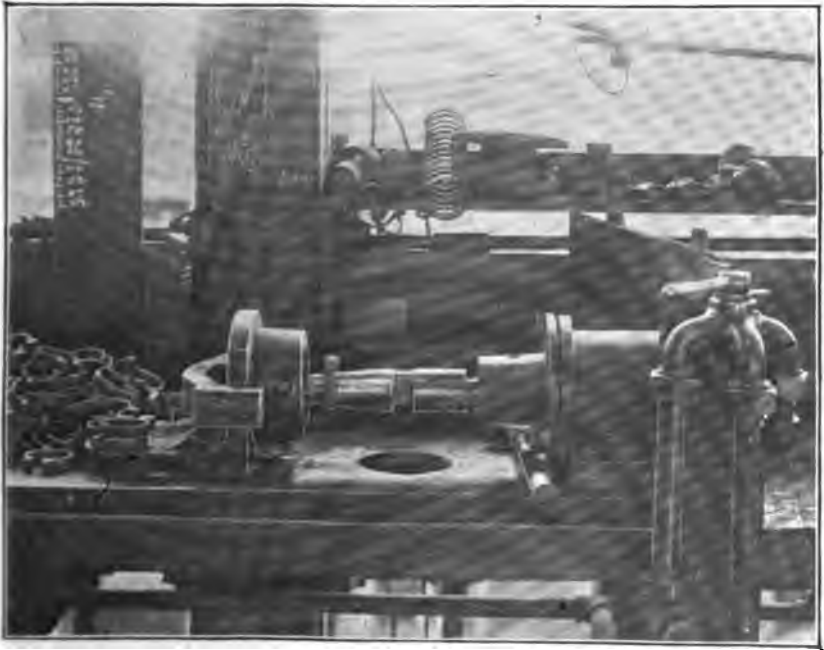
ENLARGING MALLEABLE IRON HOSE CLAMP RINGS.
